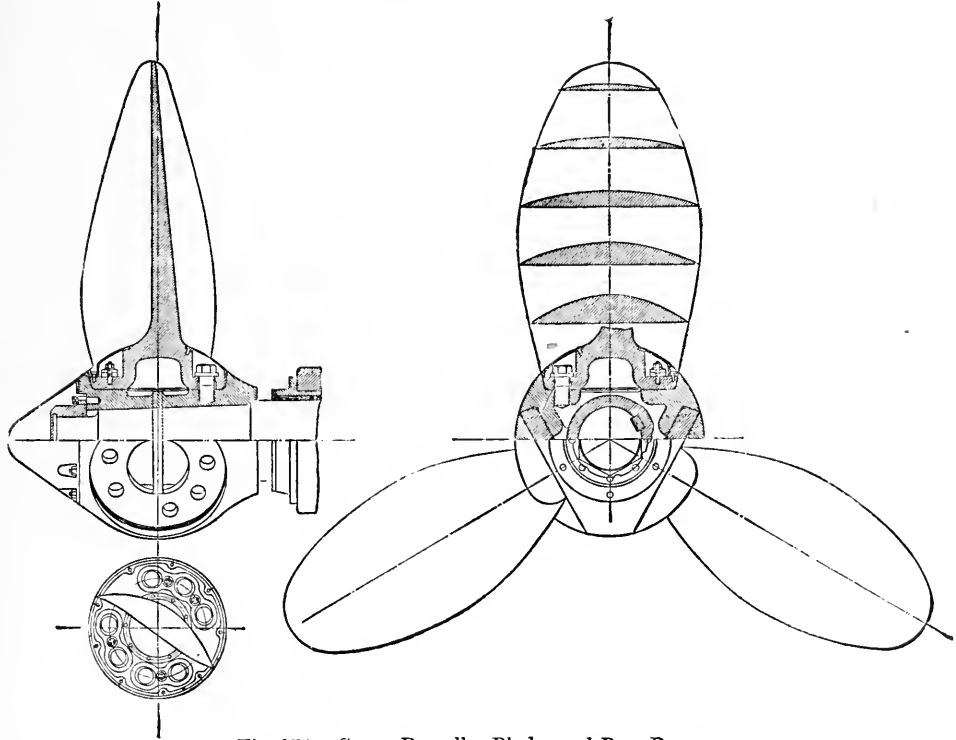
Screw Propeller Blades and Boss Bronze.
